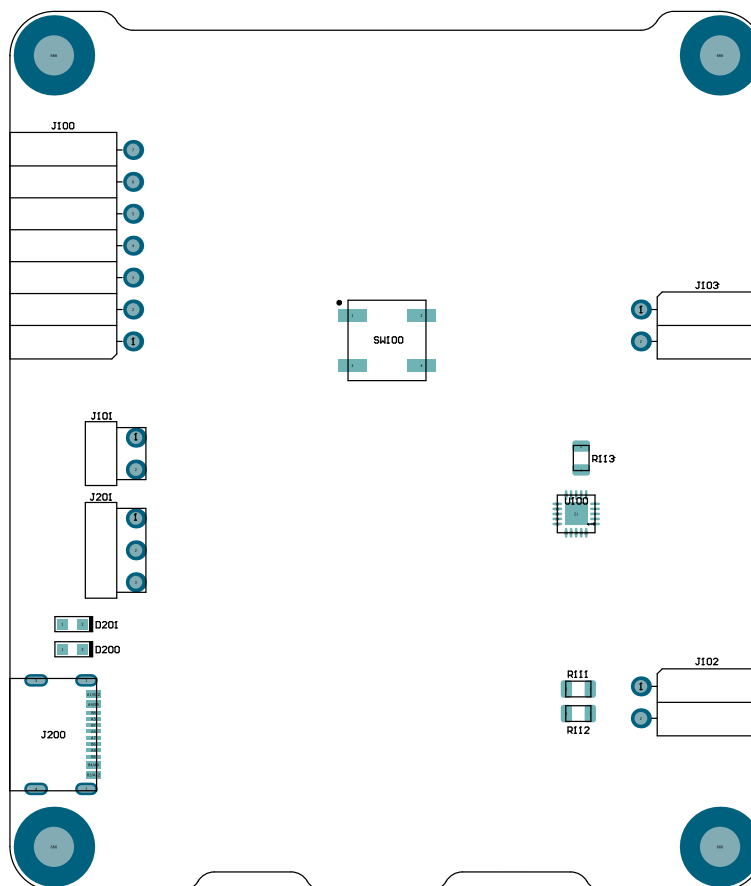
MTCH9010 Evaluation Kit Bottom Assembly
